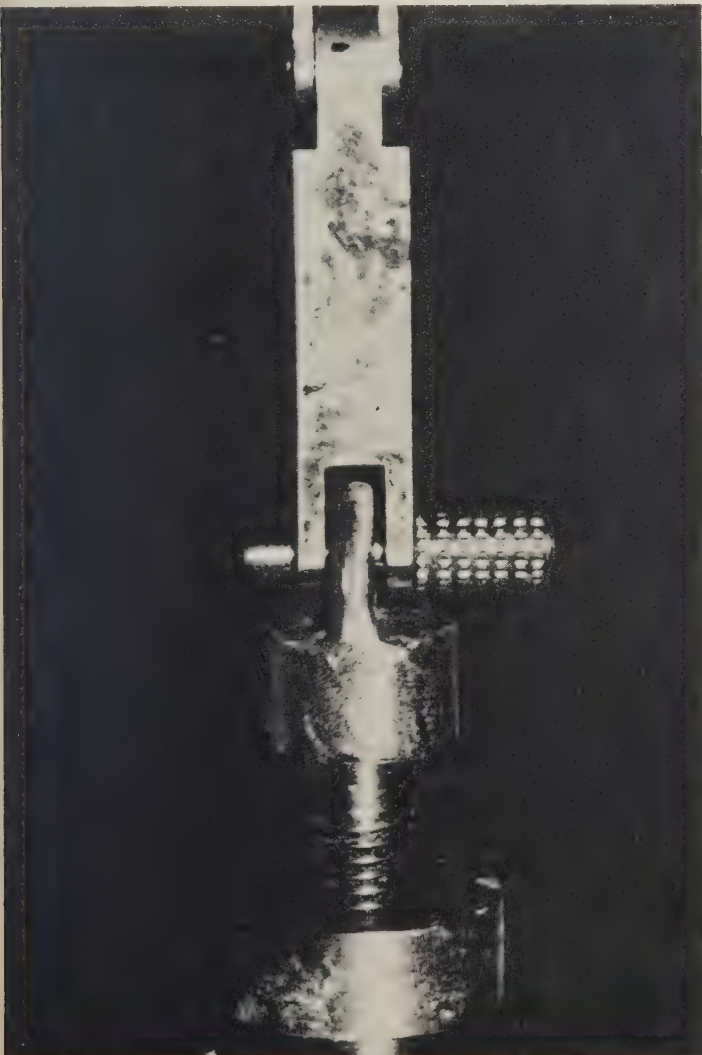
Close-up view of the cemented parts assembled in the tensile testing machine.
